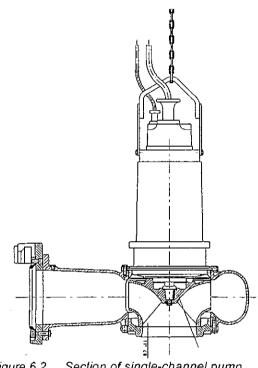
Section of single-channel pump showing impeller clearance at suction opening.
